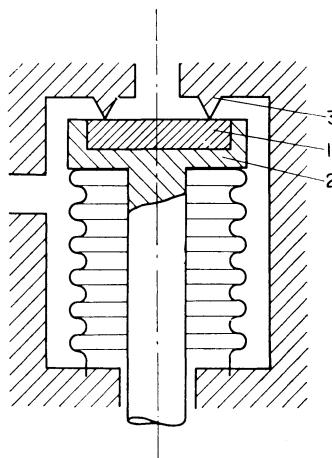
Plate valve closed with knife edge seal on indium (after Nicollian⁹²⁷)
